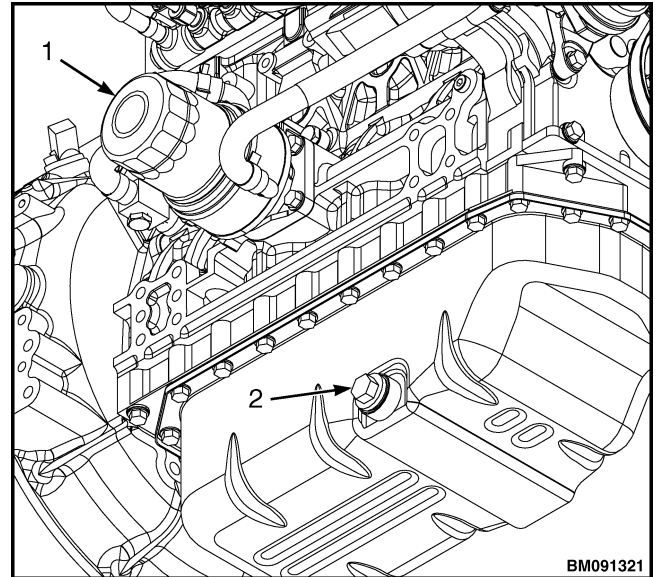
Engine oil fill (Yanmar 2.1L diesel engine)
